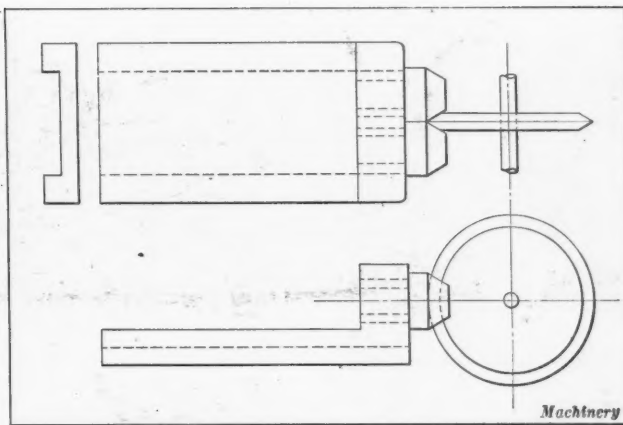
Fixture for charging Rotary Laps of the Type used on the Machine shown in Fig. 7
